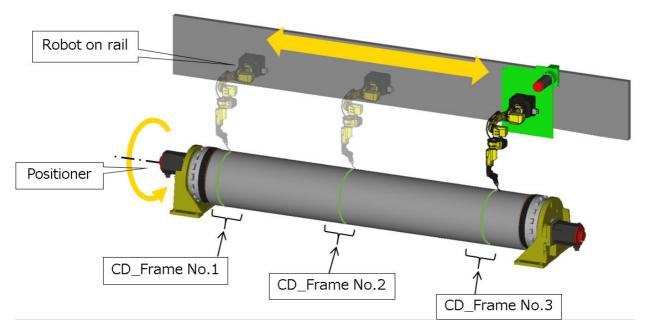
Example of a coordinated motion system between a robot on a long rail axis and a positioner
